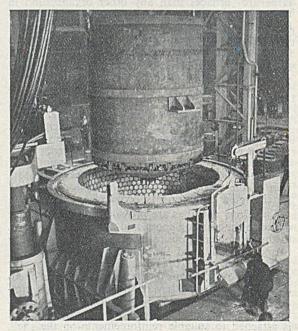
Charging Bucket lowered over the Furnace Body after Removal of the Roof. The New Furnace is lined with Metal-cased Magnesite Bricks.
